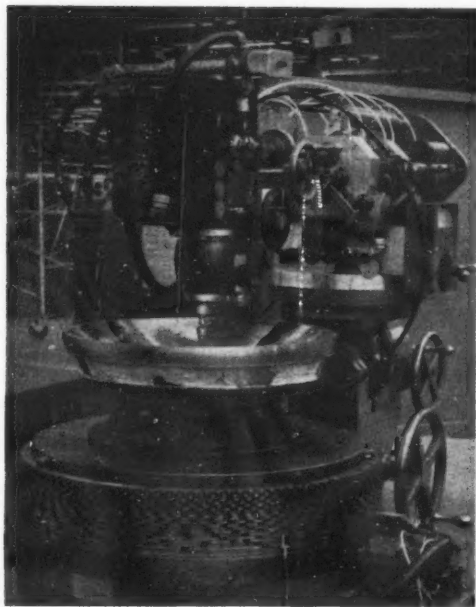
Four thousand holes of small diameter are drilled to accurate centre distances in injector heads on this machine which incorporates a special indexing arrangement
